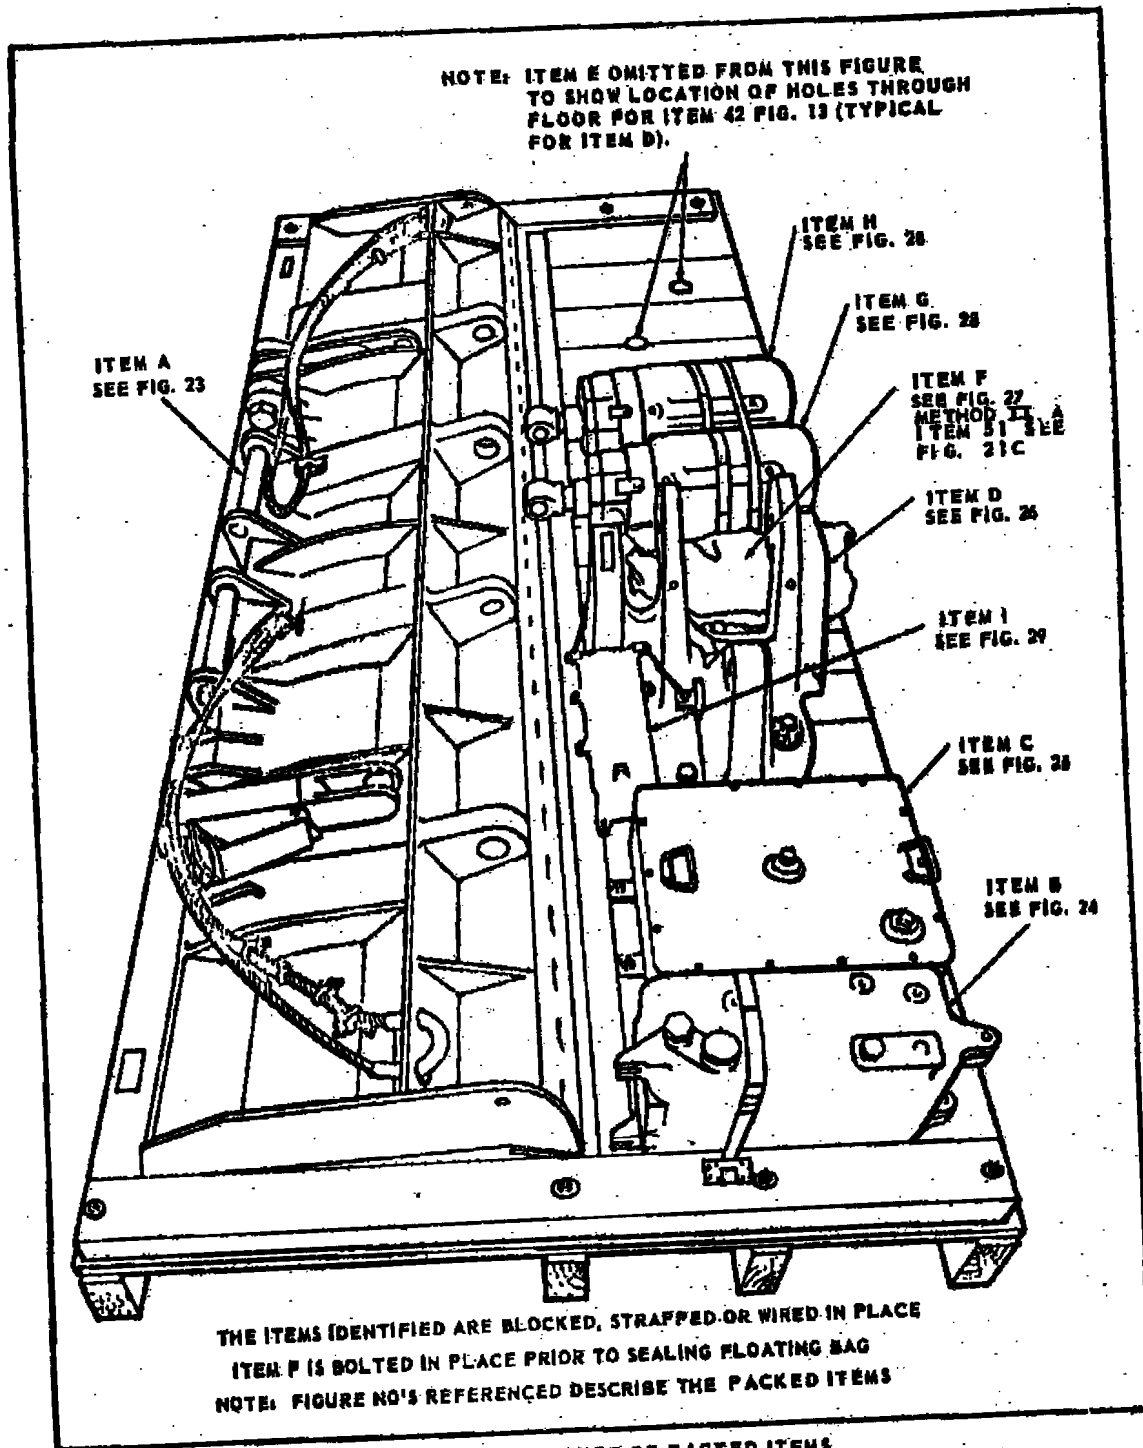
PACKING OF PARTS UNDER MOLDBOARD
